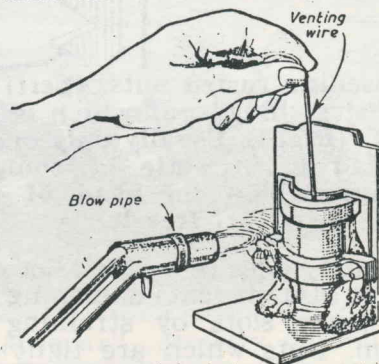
Venting or puddling. While the top of the bearing metal is kept fluid by the application of gentle heat from a blow lamp, a stiff wire is dipped lightly and rapidly in and out around the bearing.
